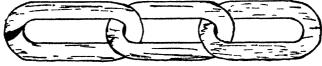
A New Link in a Chain Ready for Welding
